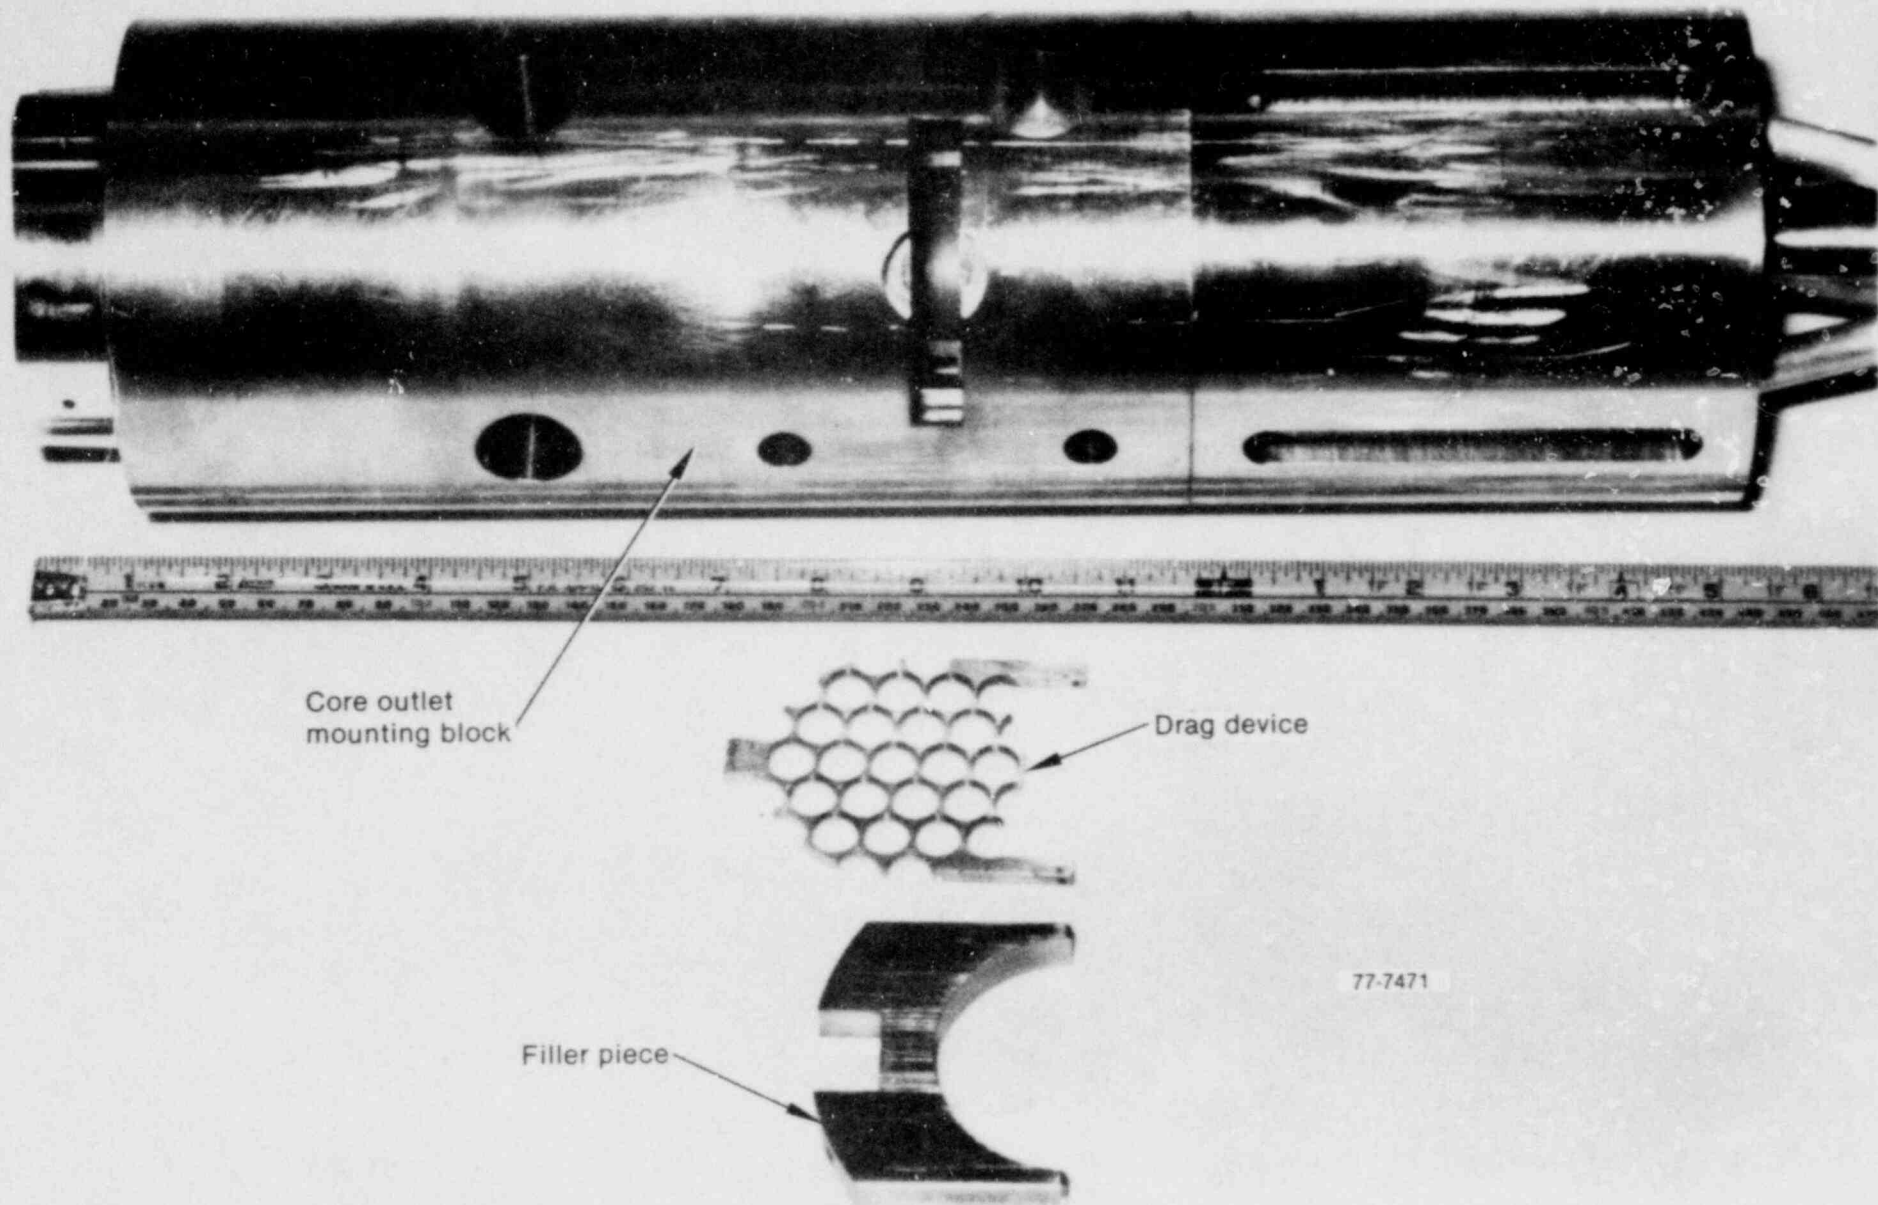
Hinged, multihole drag plate and instrument housing for core outlet measurement location in Semiscale Mod-3.
